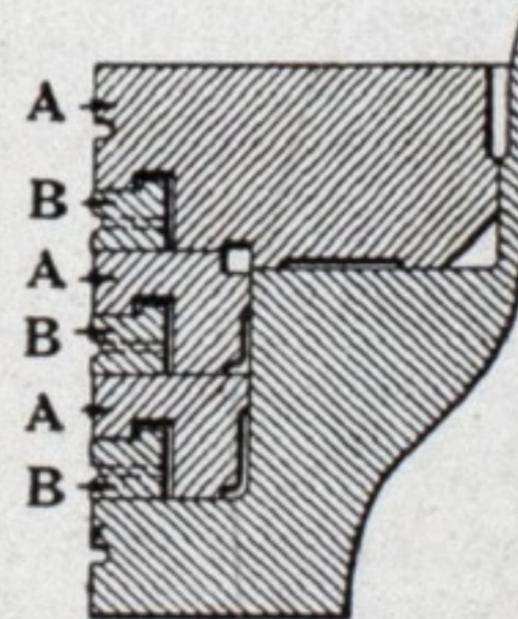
Piston packing ring with expansion restricted by a shoulder
